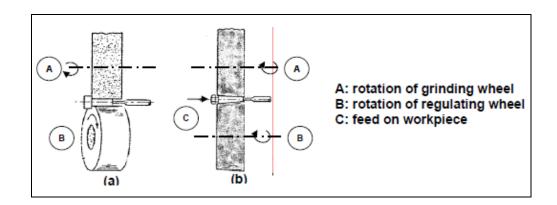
Center less (a) In feed; (b) End feed grinding
